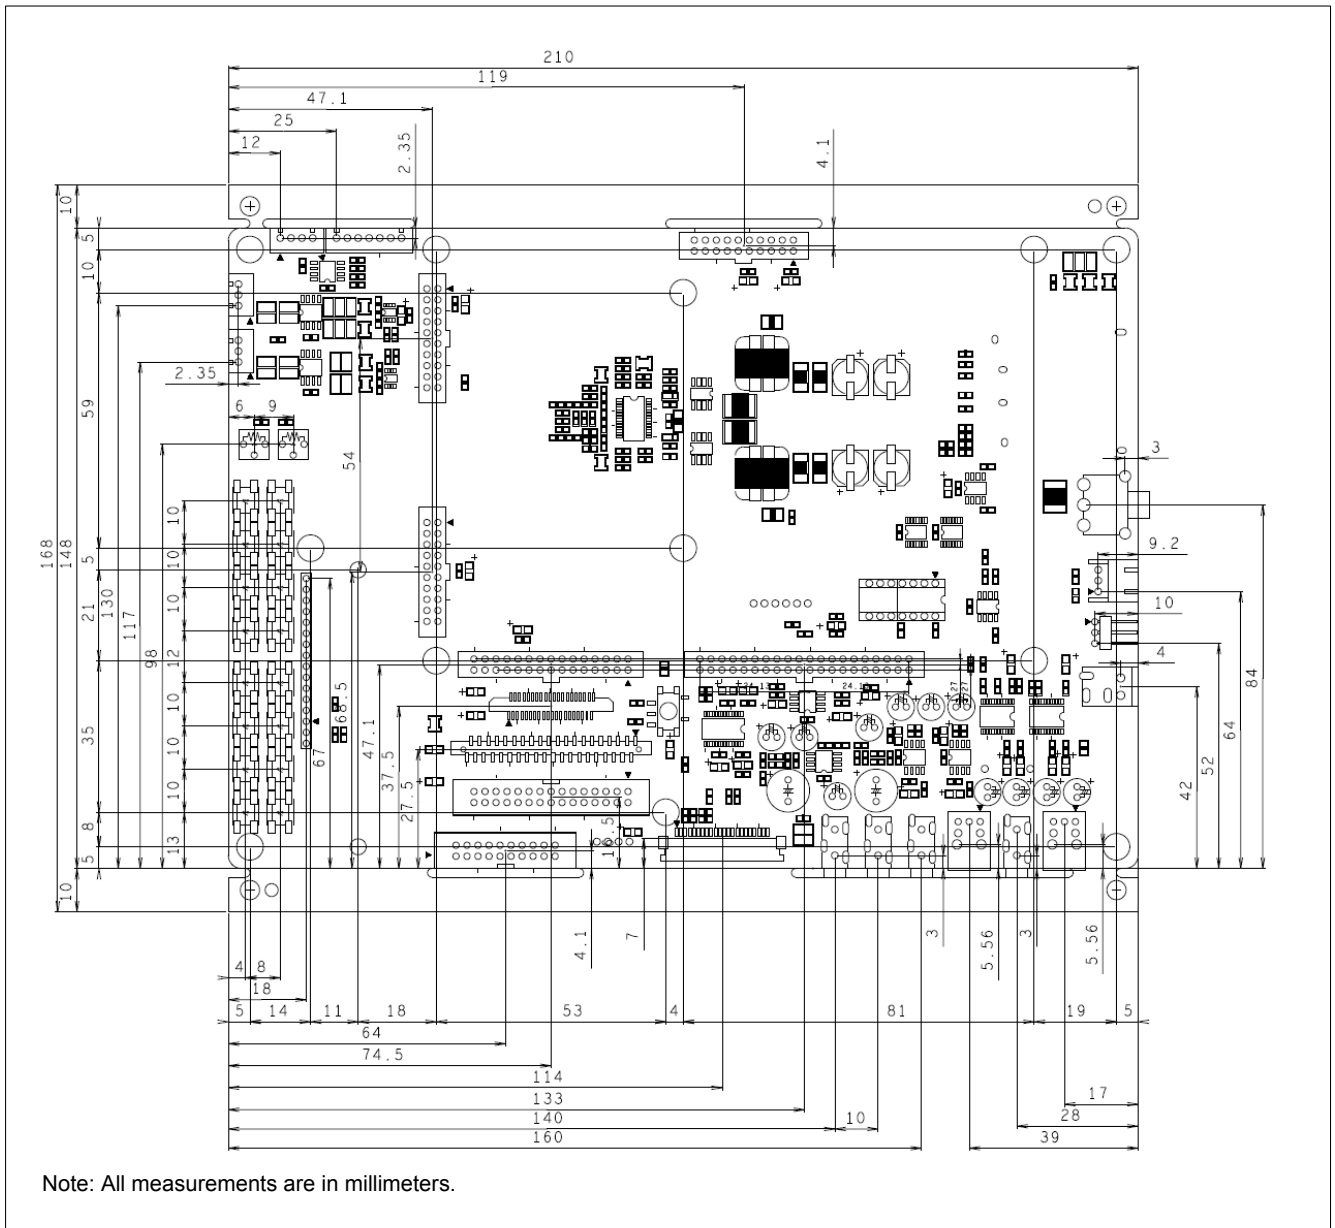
M3A-HS64G01 Dimensions (Top View of the Component Side)
